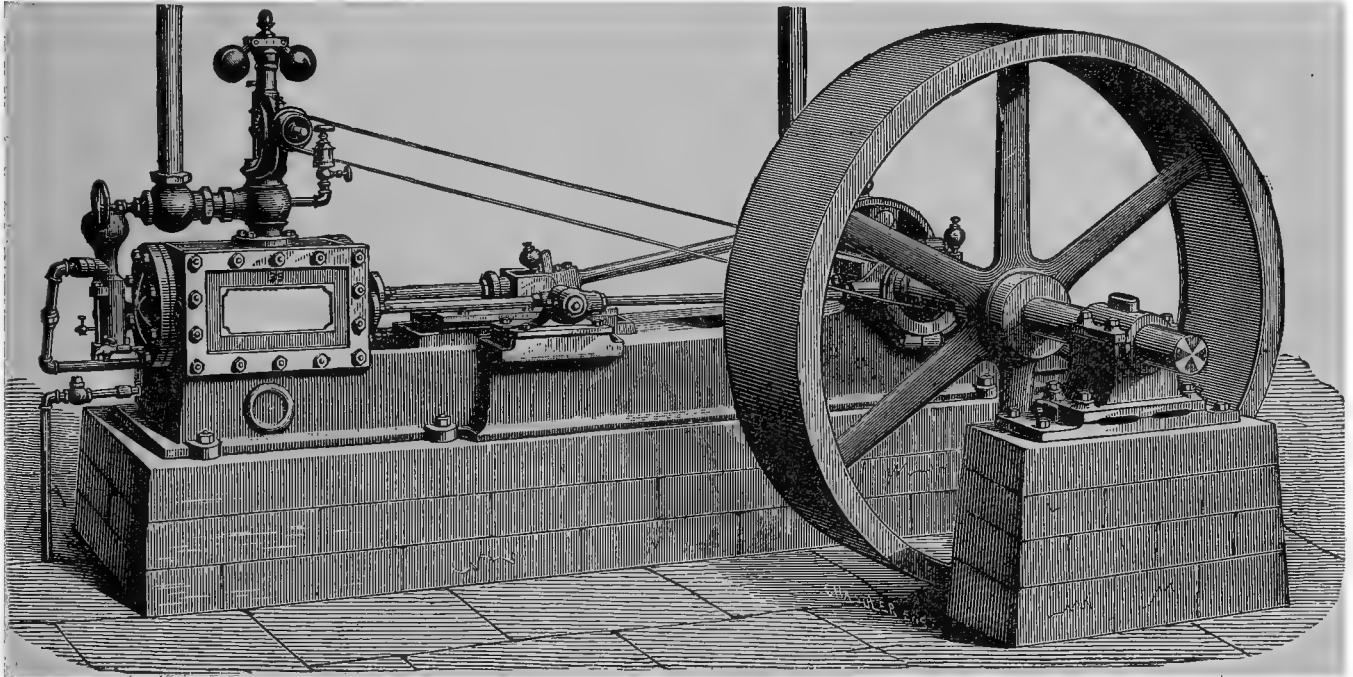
ATLAS SLIDE-VALVE ENGINE.
